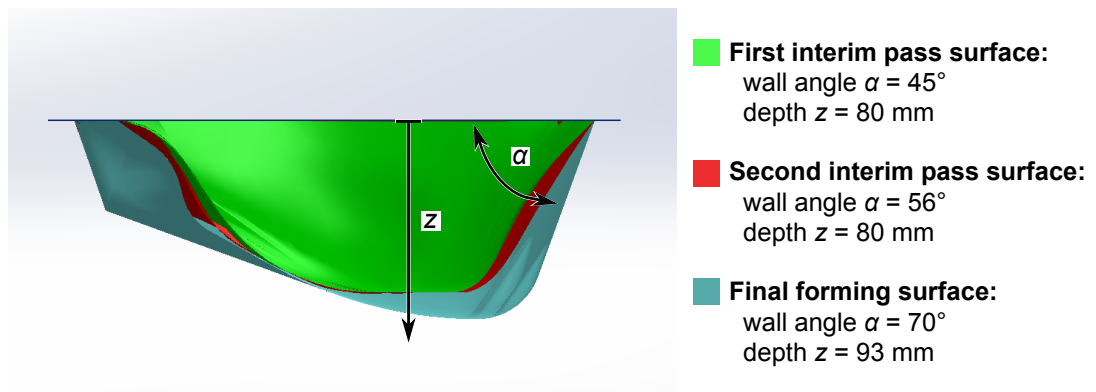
Cross sectional CAD model of the interim and final passes for the seat base, showing key dimensions.
